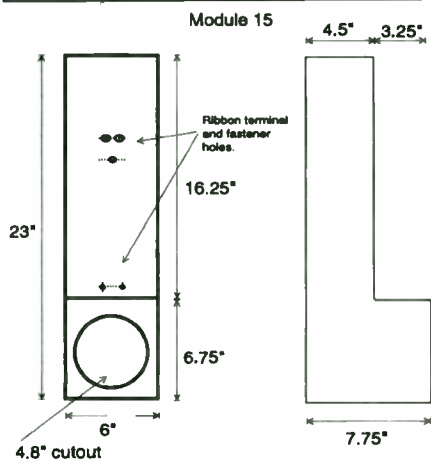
Module 15 dimensions, showing holes for bolts and ribbon leads.
